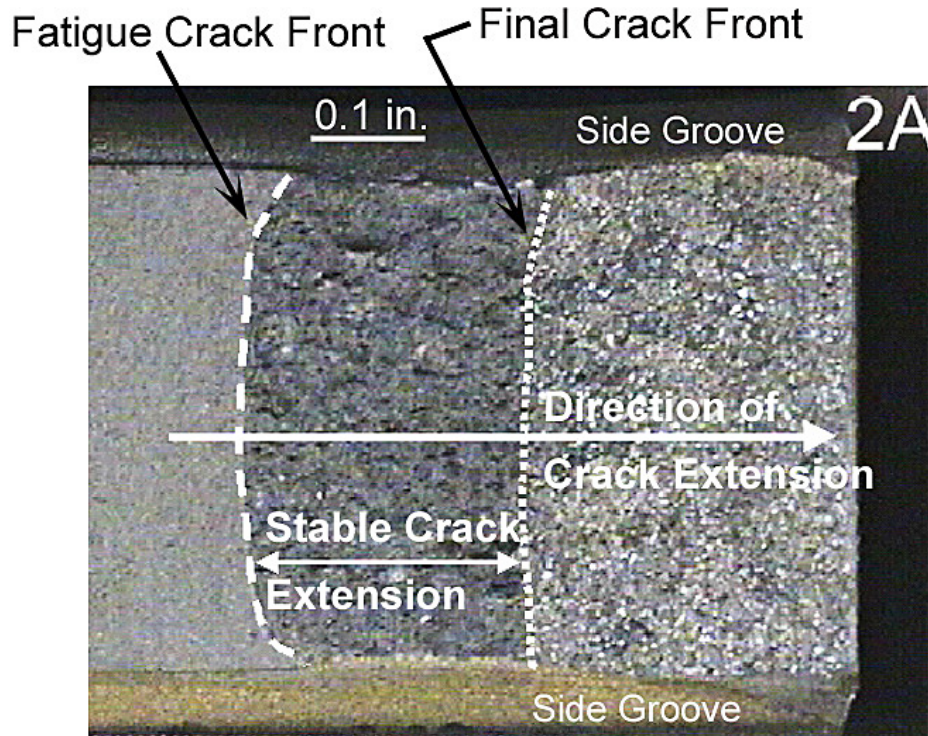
Typical fracture surface of the SENB Specimens.
